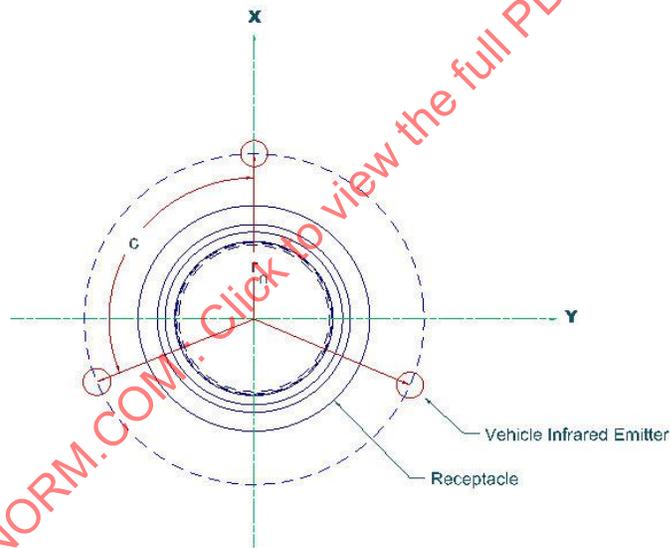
NOZZLE RECEIVER (FRONT VIEW)
